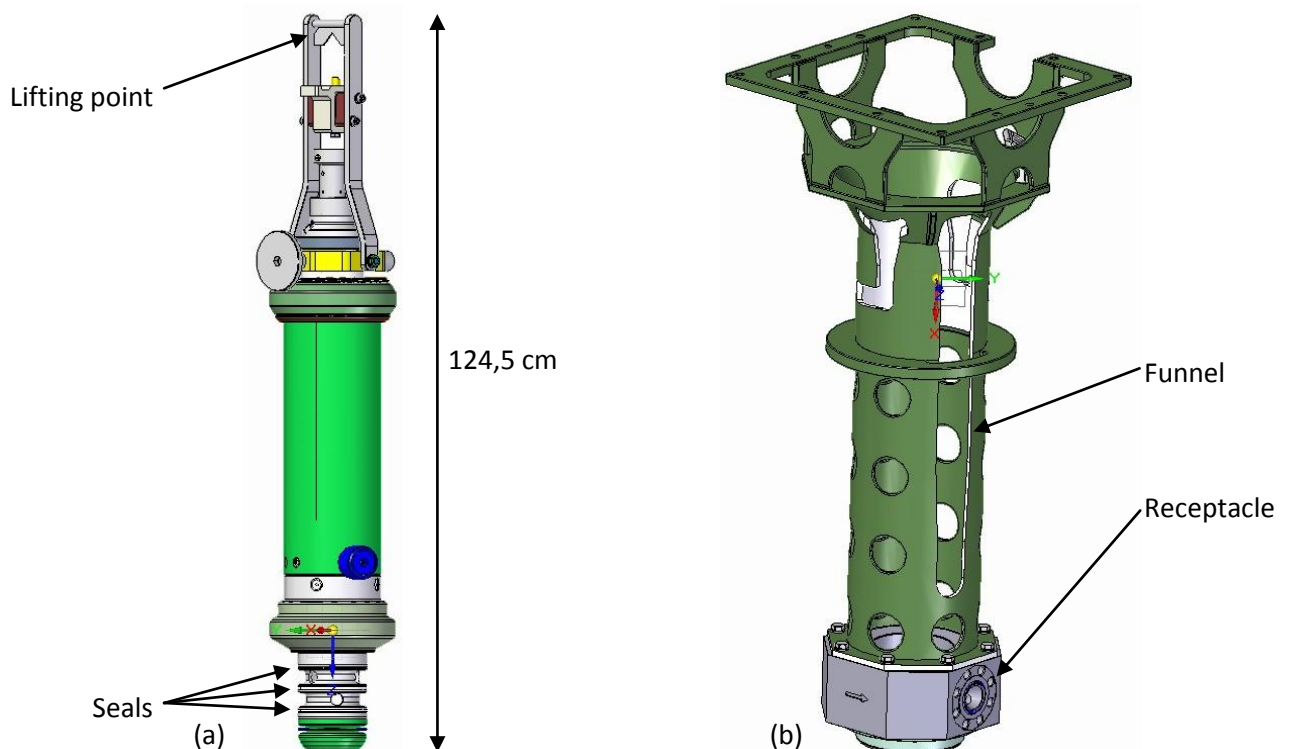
Illustration of the Roxar subsea Chemical Injection valve where (a) is showing the retrievable valve assembly and (b) is showing the fixed part, namely the funnel and receptacle assembly. The retrievable section is to be lifted by crane or equivalent by the handle assembly shown in (a). Three seals are engaged into the receptacle for sealing purpose.
